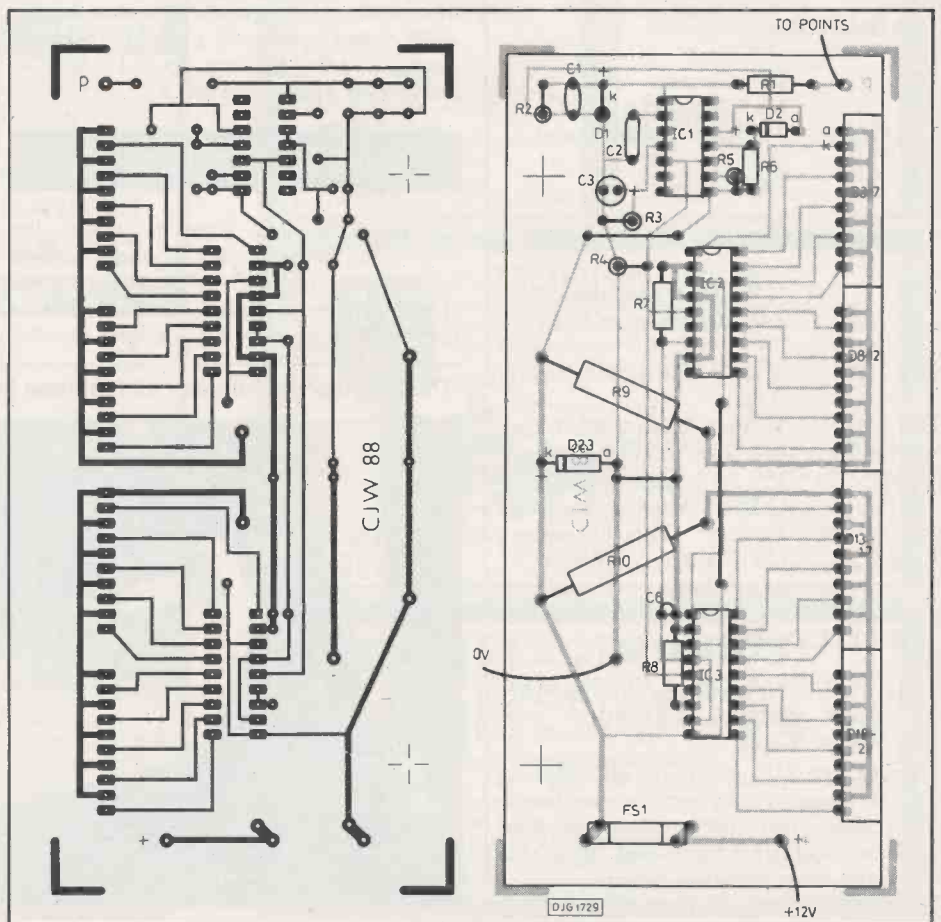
and 6. PCB track and component layouts. Note that these are shown less than life size - the pin spacing for the ICs is 0.1 inch. C4 and C5 should be hard wired to the track side of the PCB, polarity as shown in Fig 3.
